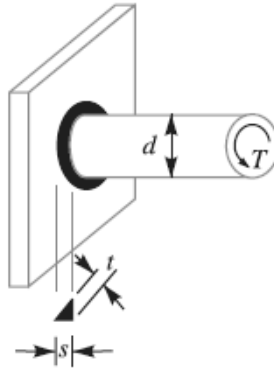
Circular fillet weld subjected to torsion.
